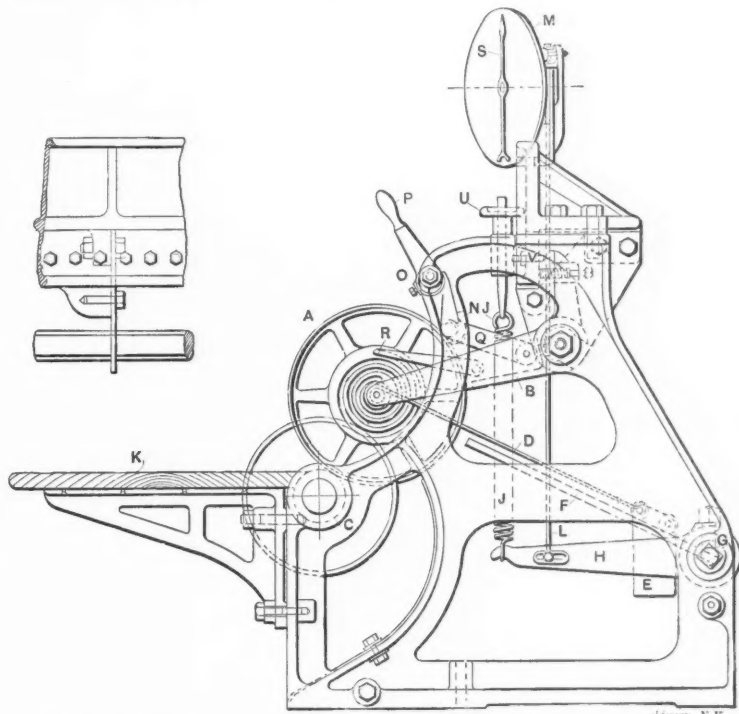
Side View, showing Measuring Wheels and Weighing Mechanism.
